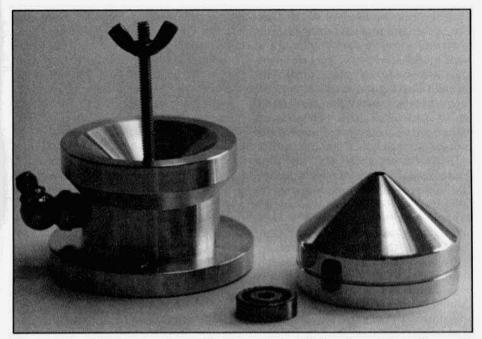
A miniature version of the larger industrial packers. It's easily replicated if you or a friend have a lathe.
